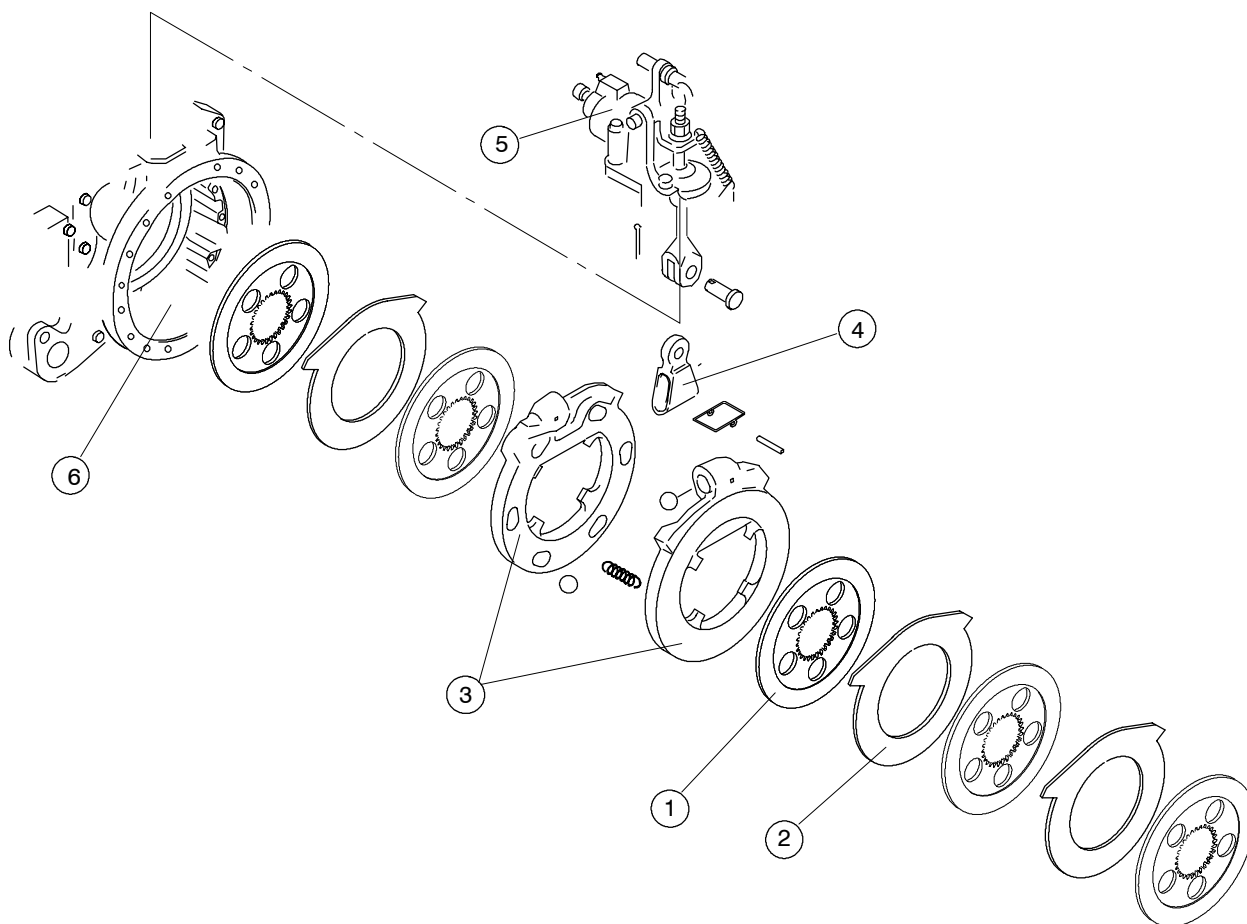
A. Brake mechanism in 8350–8950Hi tractors, which has final drives 700 (L32106–).
